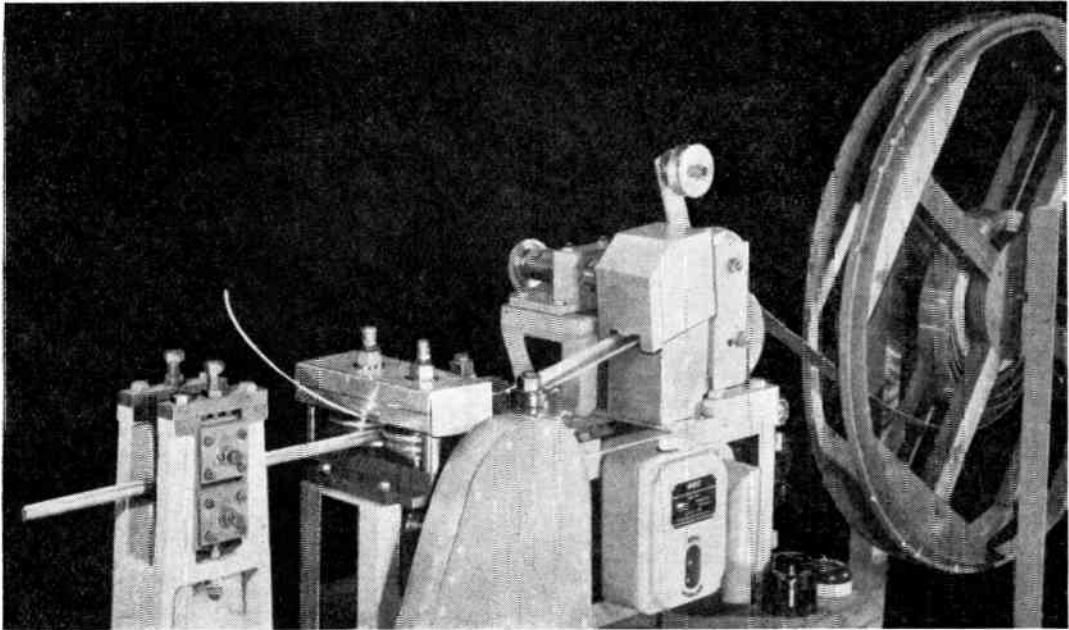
Experimental machine for making aluminium-sheathed cable by Cold Pressure Welding.
